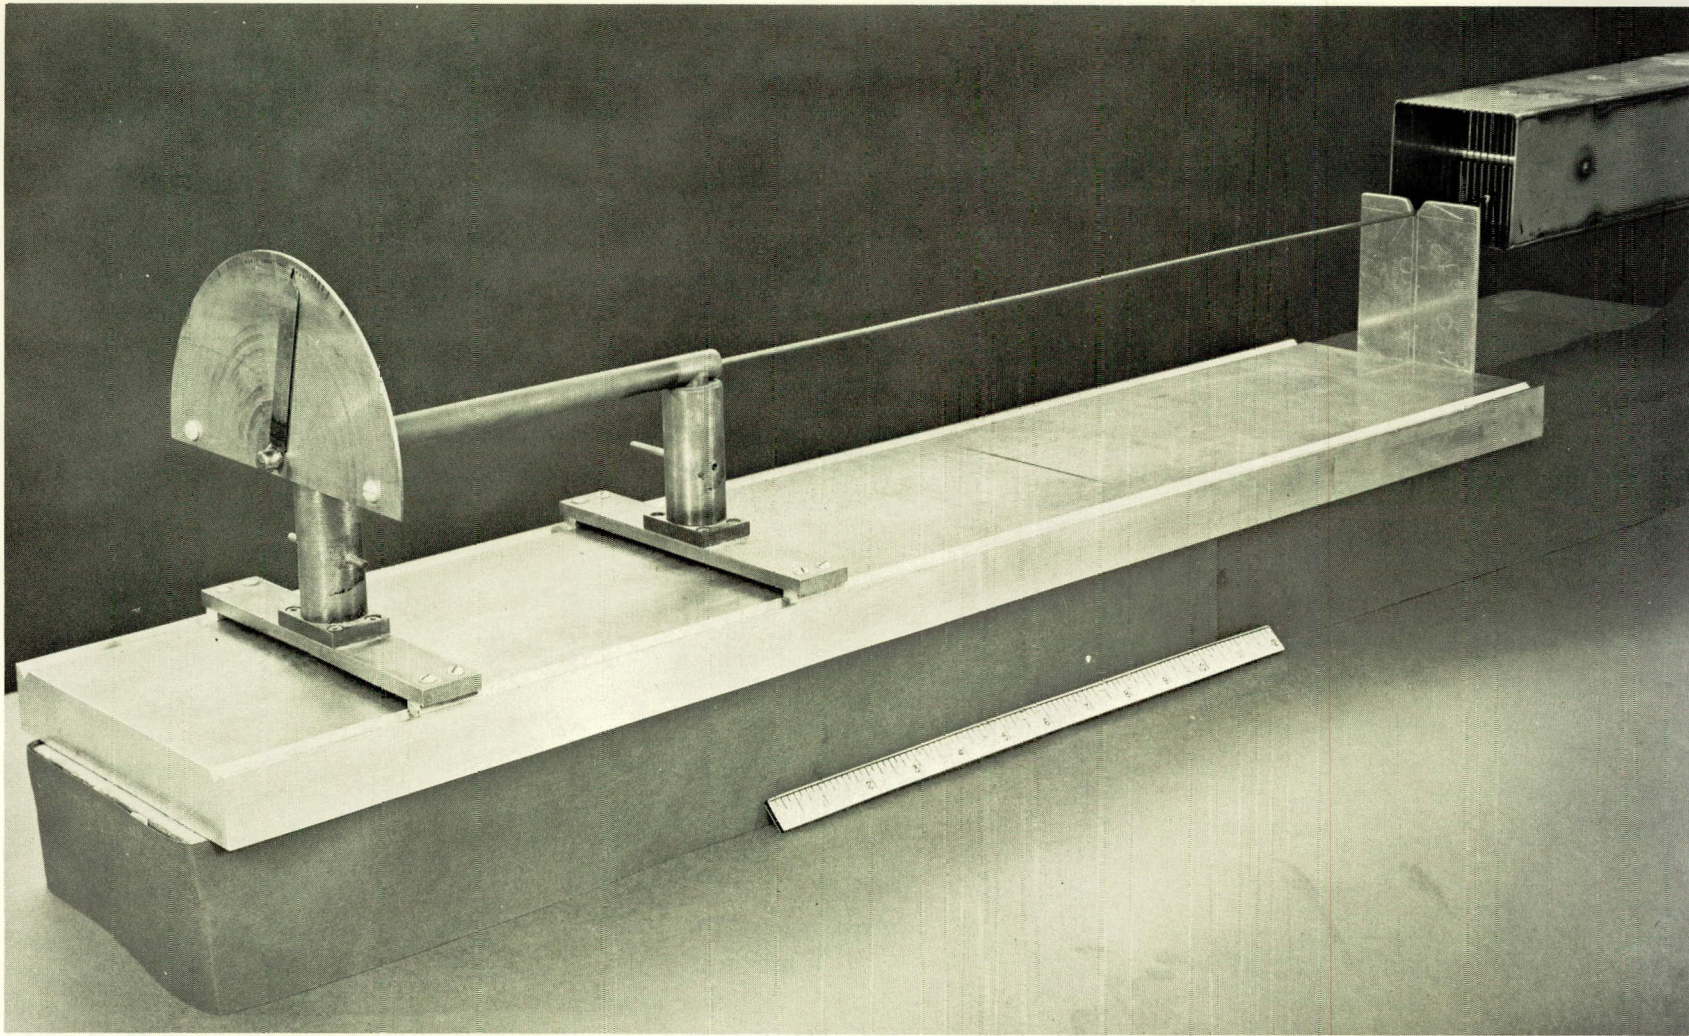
Inspection Tool for Checking Spacing Between Fuel Plates
